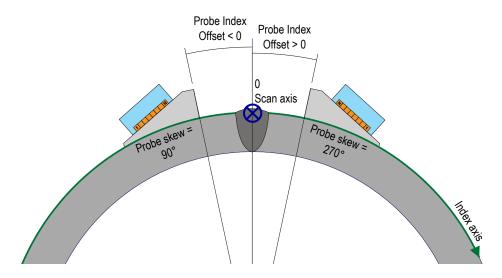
Tube weld inspection with 90° and 270° probe skews
